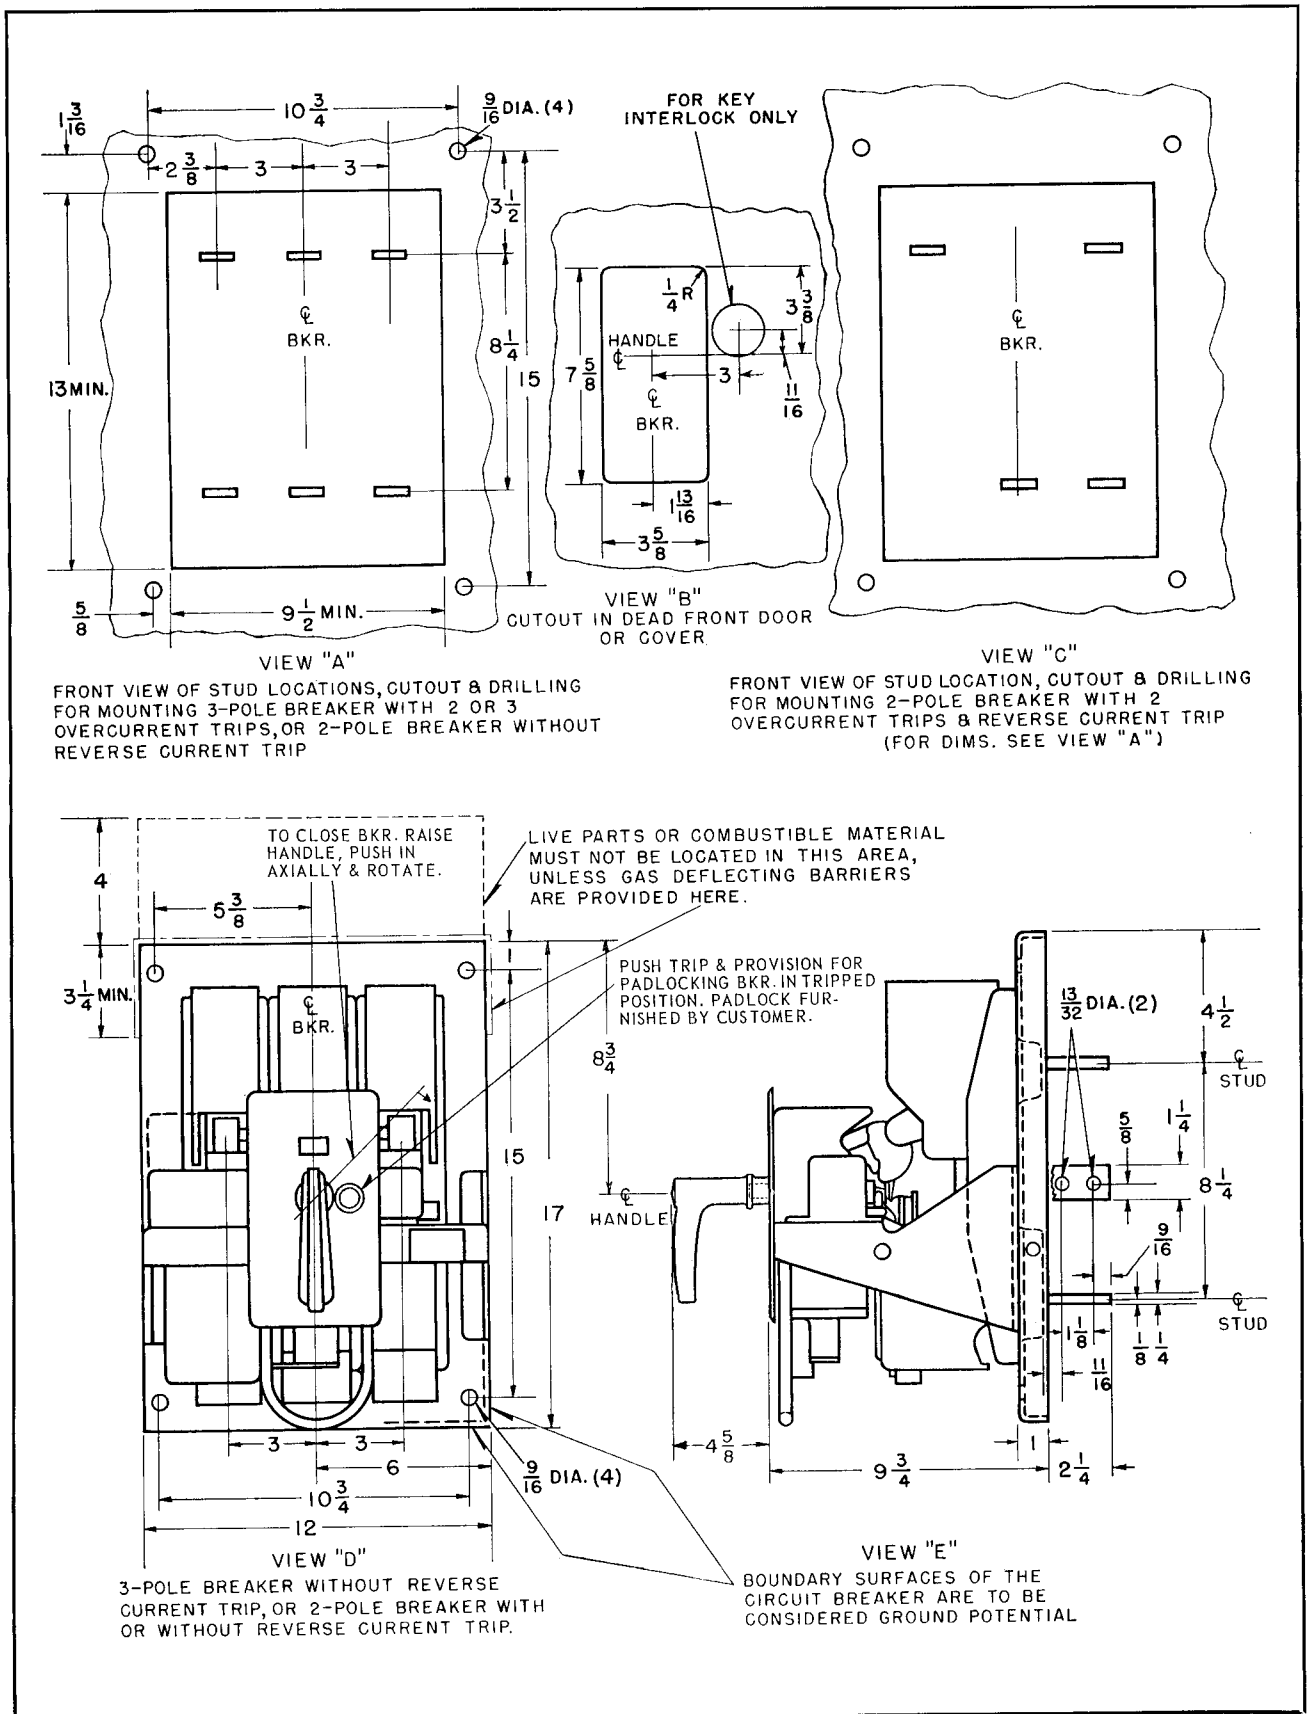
DB-15 Outline Dimensions and Mounting Details
